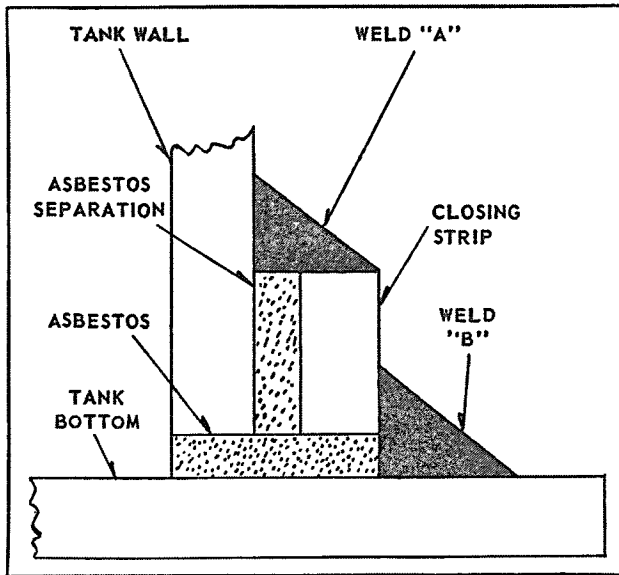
Weld between Tank Wall and Tank Bottom
